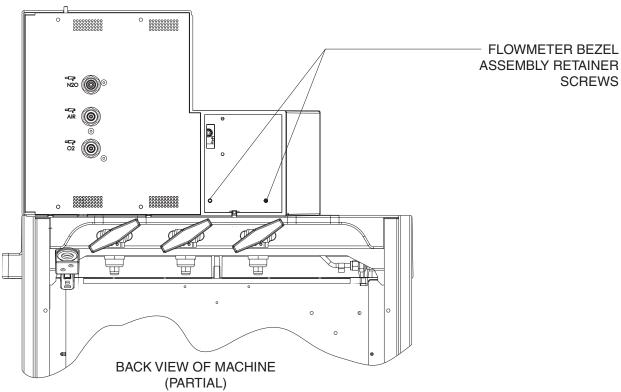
Flowmeter Bezel Assembly (Fabius GS Machines with Serial Numbers  $\geq$ 12191)
